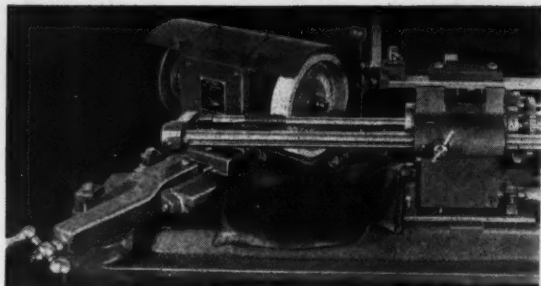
Illustration showing wheel head of Blake No. 2 Tap Grinder at extreme rear position
